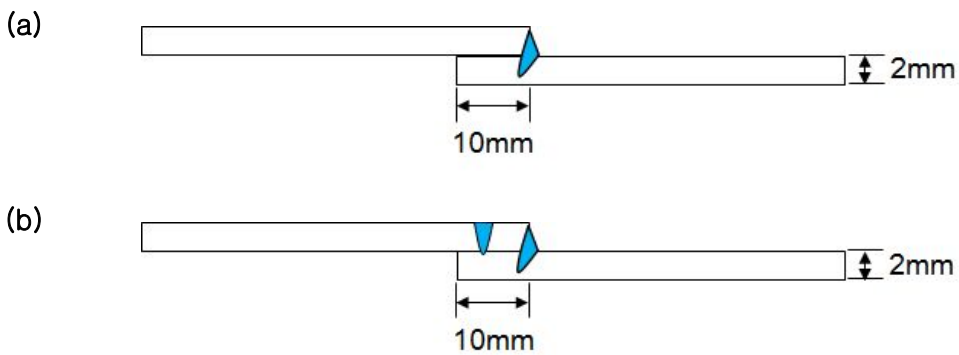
Dimensions of LASER welded specimen;
